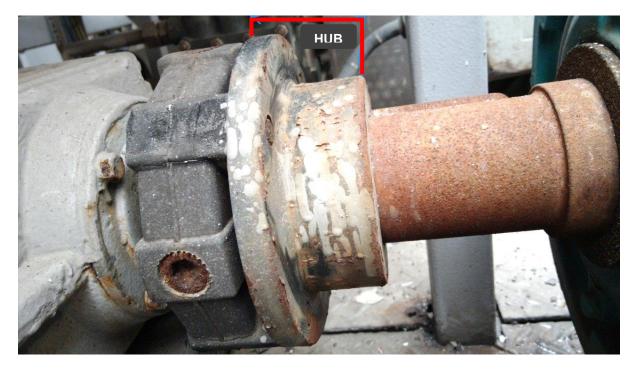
Coupling Assembly Connected to the Fire Water Pump
